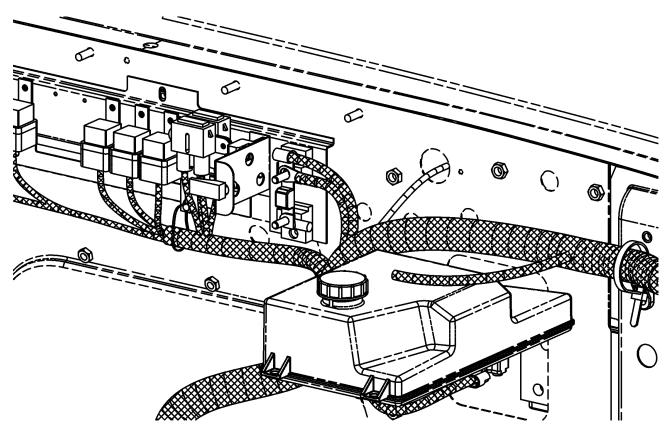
Air Dryer And Heated Drain Valve Wiring (Right Side Shown)
